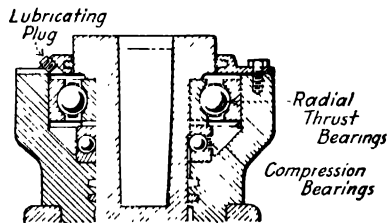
Ball Bearings Used for Compression and Radial Thrust.
